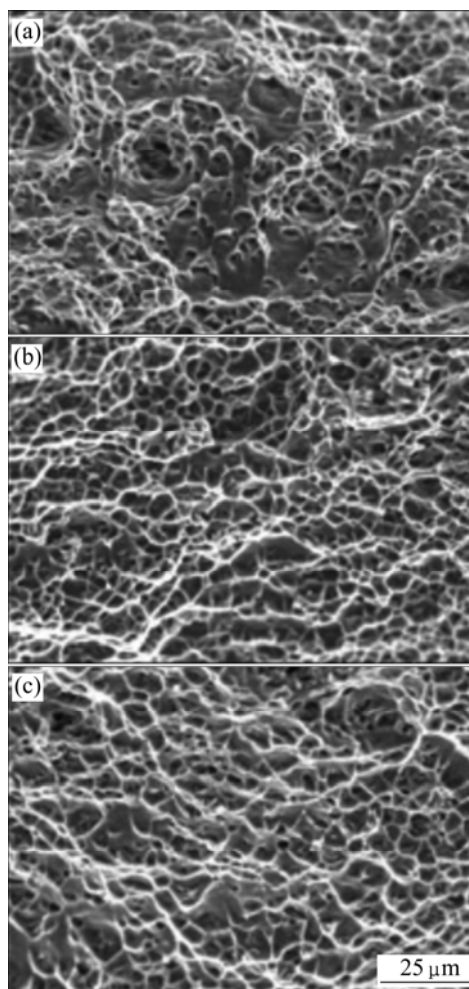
Micro-fracture morphologies of tensile samples: (a) Dissymmetrical “X” cross-section; (b) Symmetrical “X” cross-section; (c) Consistent “H” cross-section
